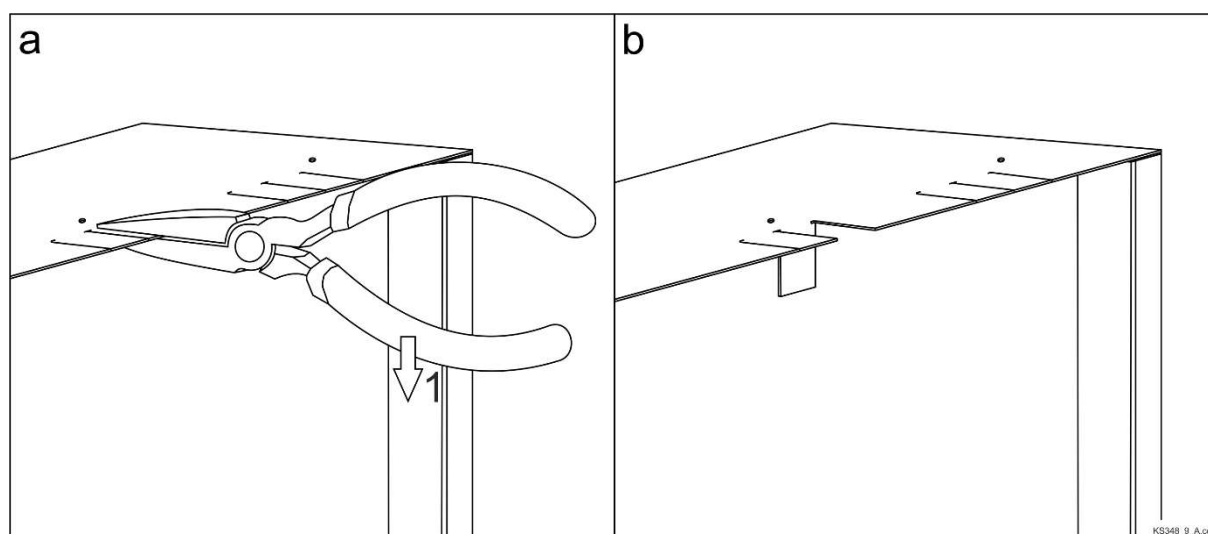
Forming a cable entry hole in the bottom or top wall of the enclosure
